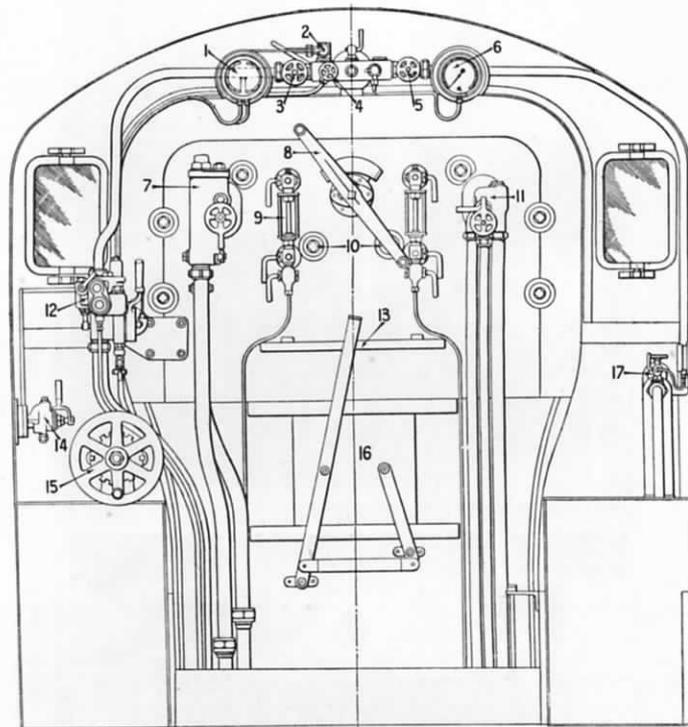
ARRANGEMENT OF FOOTPLATE FITTINGS:
